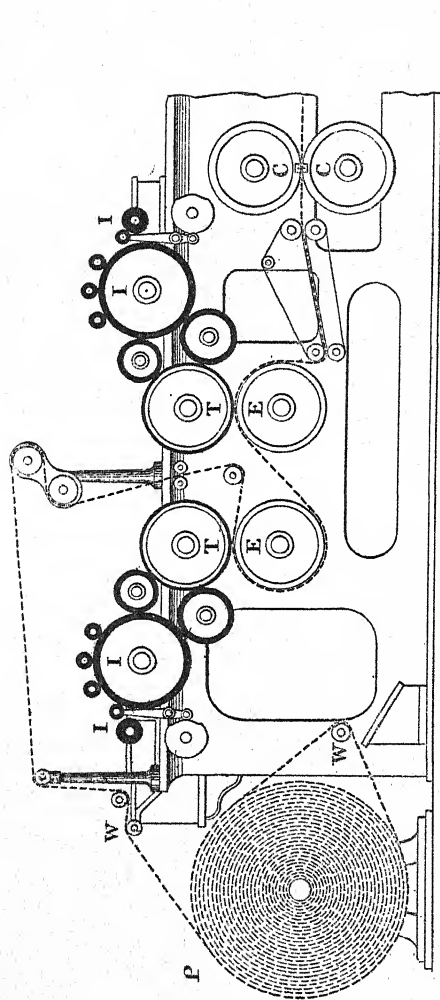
THE VICTORY SINGLE REEL ROTARY MACHINE.
